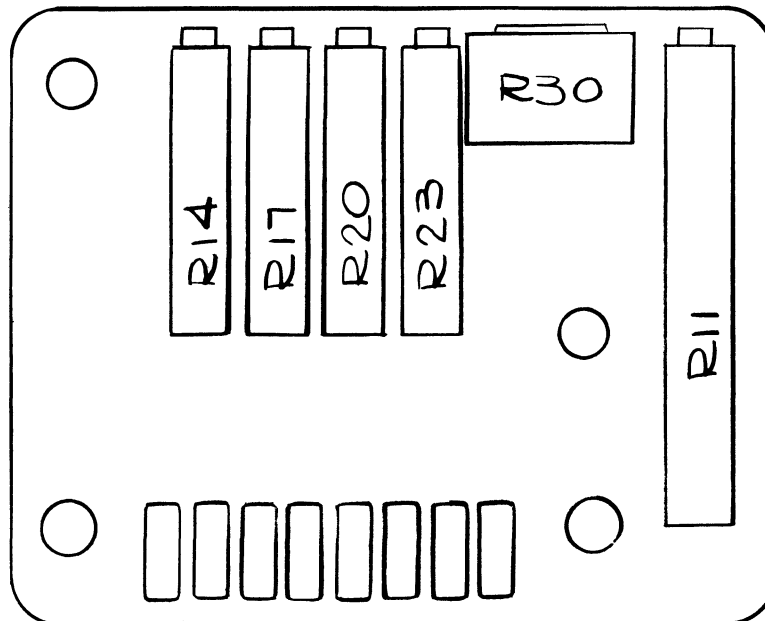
ADJUSTMENT PCB ASSEMBLY
